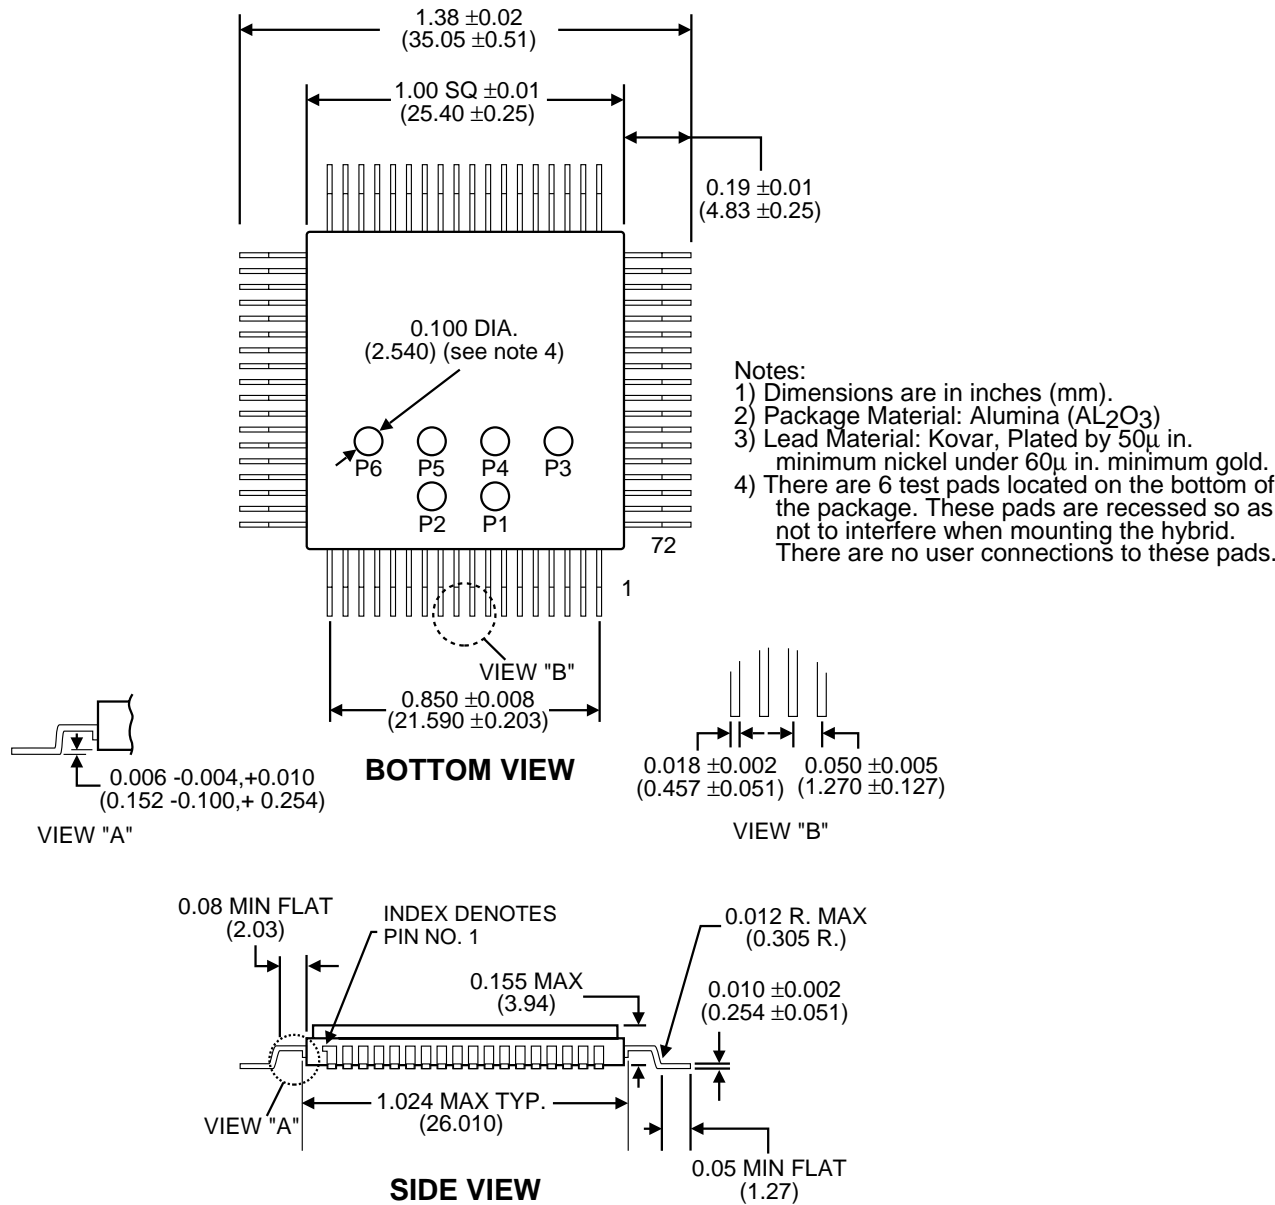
MECHANICAL OUTLINE DRAWING FOR 72-PIN GULL LEAD PACKAGE
